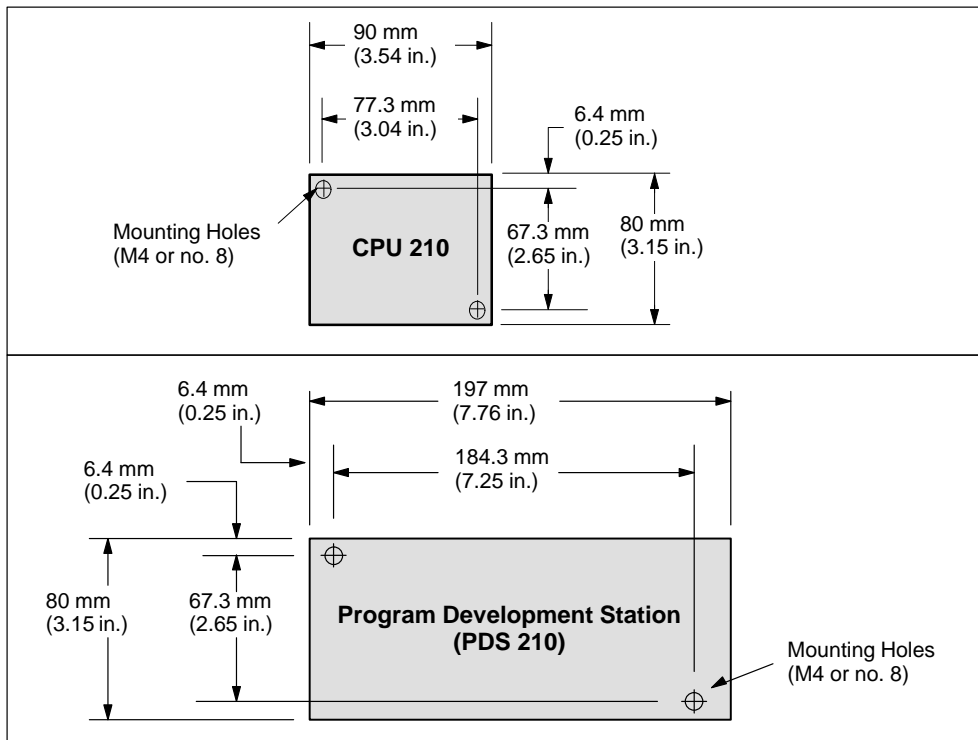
Mounting Dimensions for the CPU 210 and PDS 210
